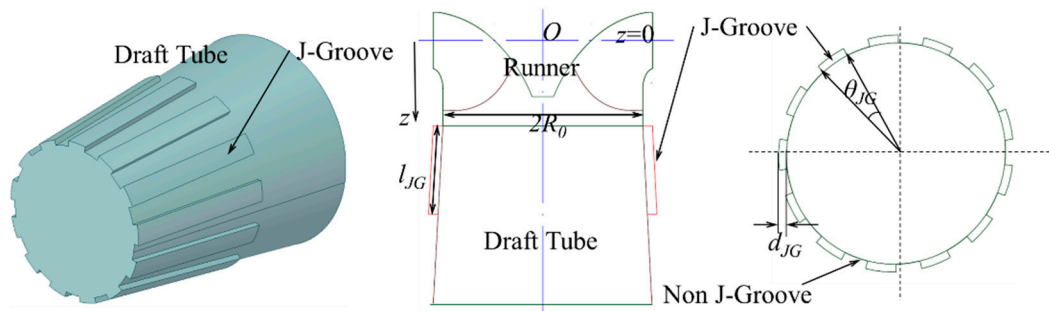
J-Groove shape install on the draft tube inner wall and design parameters.
